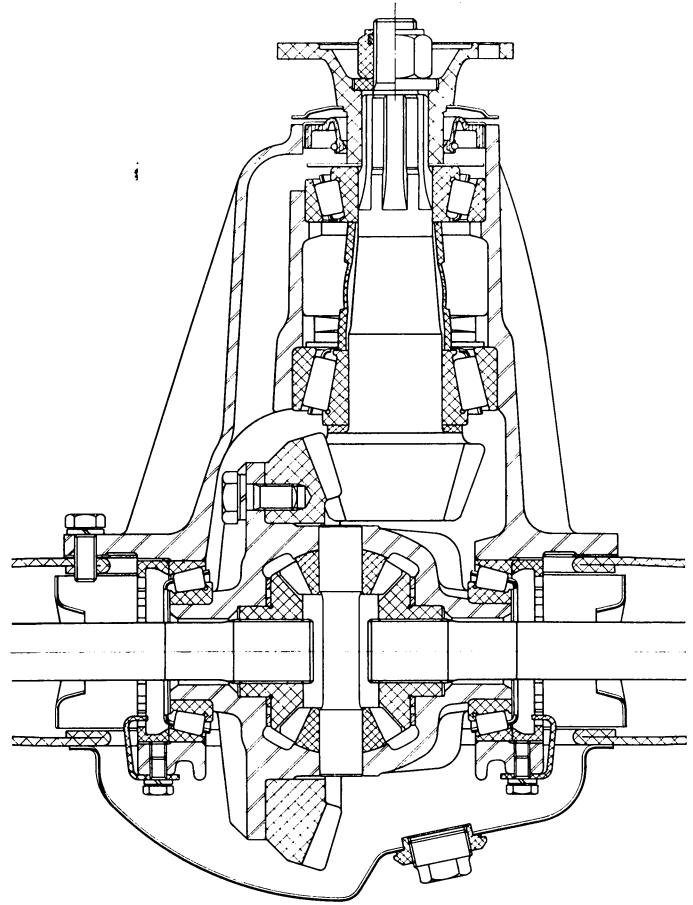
Section view of differential carrier assembly across final drive gear and differential case gear.
